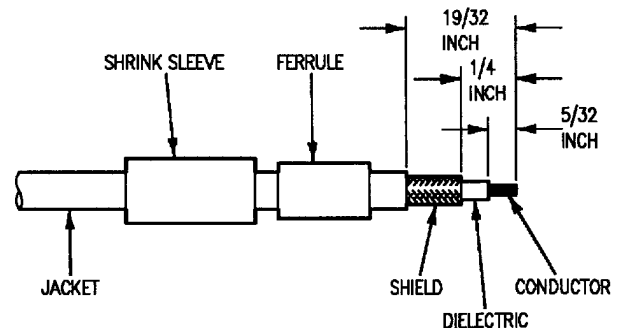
M39012/28-0503 and M399012/28-0018 Coaxial Connector Repair (Sheet 2)
